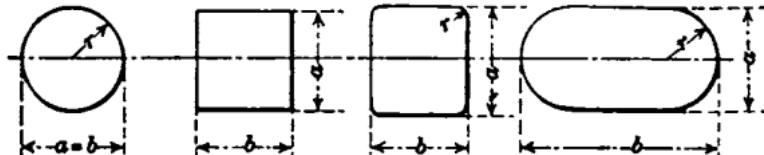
Core shapes and dimensions for electromagnet windings.
